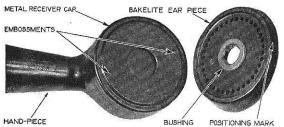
View Showing Receiver End of Monophone Hand Unit with Ear Piece Removed
